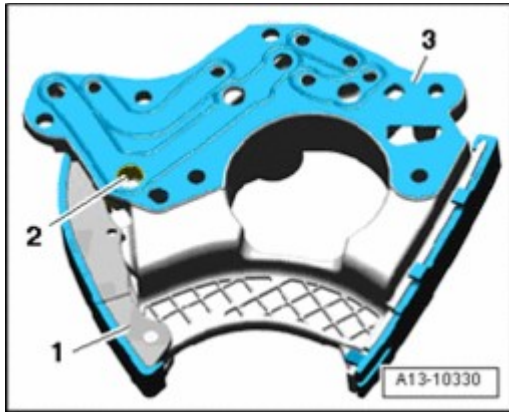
Identifying Chain Tensioner Oil Screen, Gasket & Chain Tensioner
